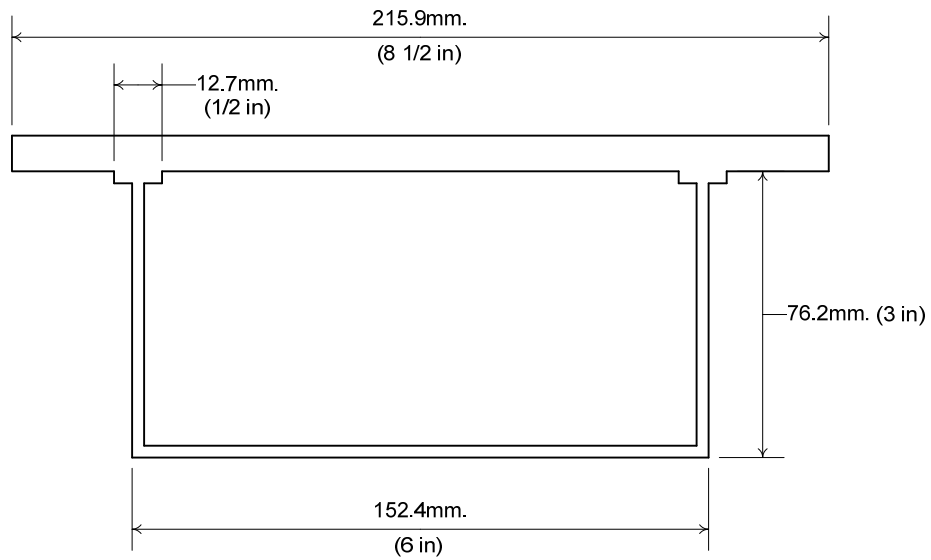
Cross-Section of Shape 5, Shallow Open-Topped Box
